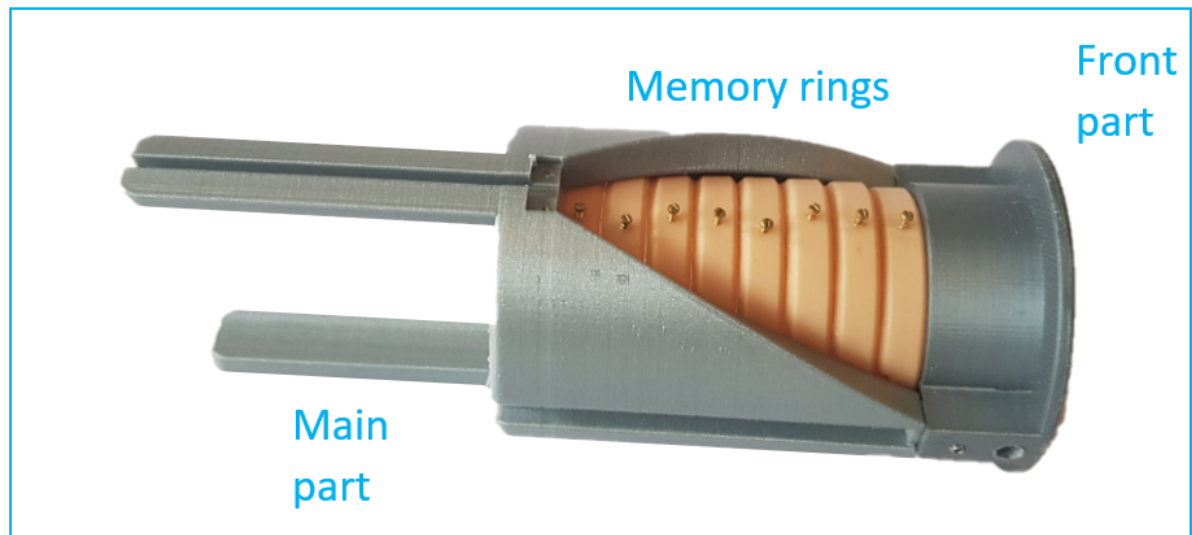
Picture of the translational motion parts including the memory rings of the 3D printed prototype
